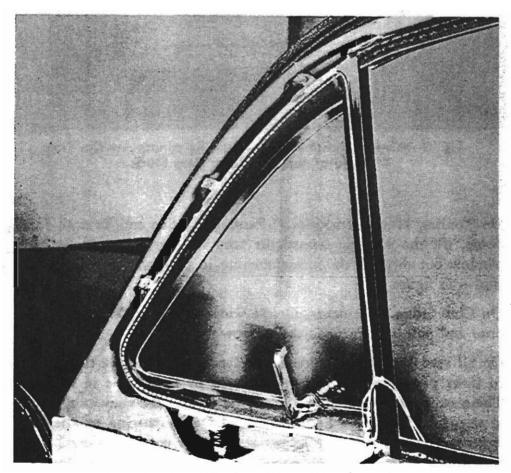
Place Cord in Window Wing Weatherstrip to Position-Weatherstrip When Moulding Is Installed.
